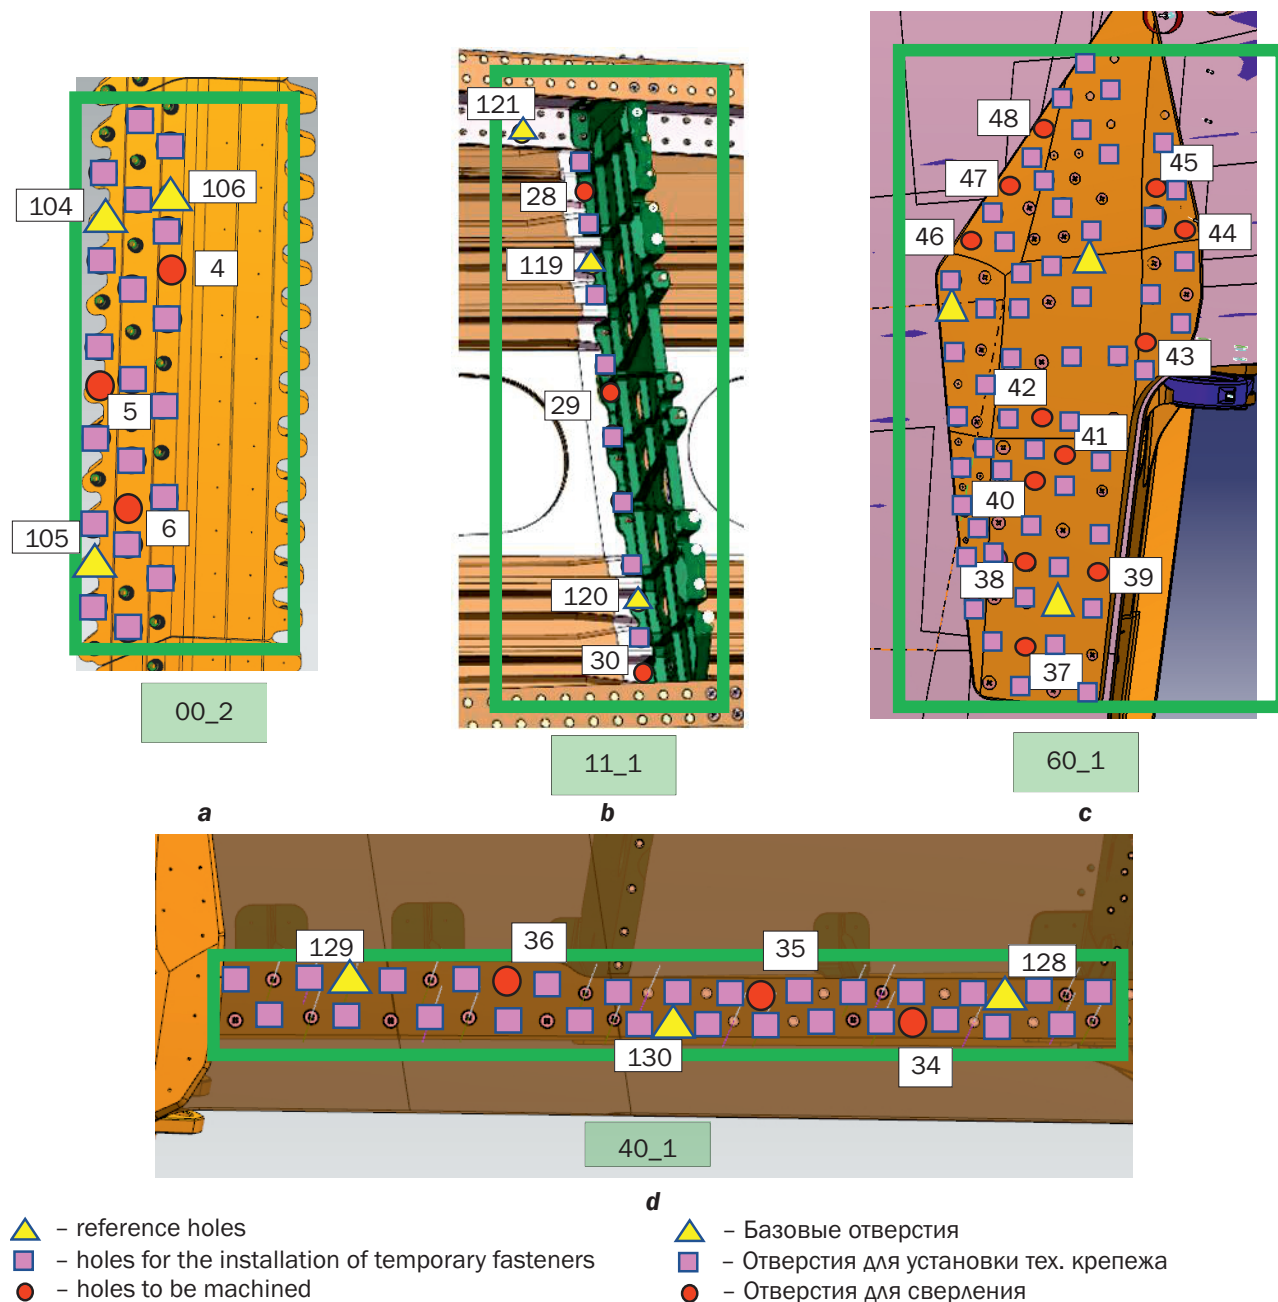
Typical hole machining zones in the test wing box: a – for rib 0 splice plate; b – for ribs; c – for the traverse beam; d – for the rear spar cap
